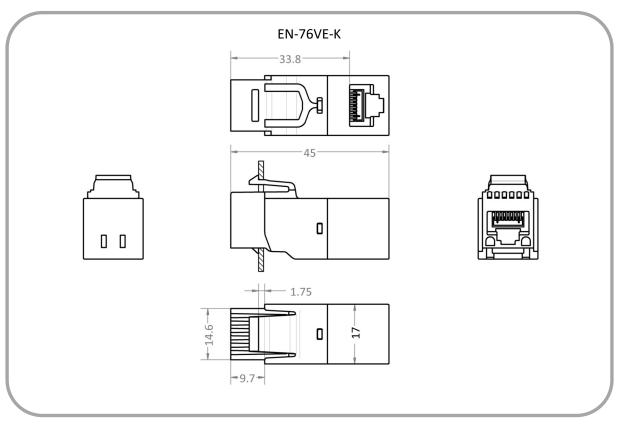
Technical drawings for EN-76VE-K. All dimensions are in millimetres.
